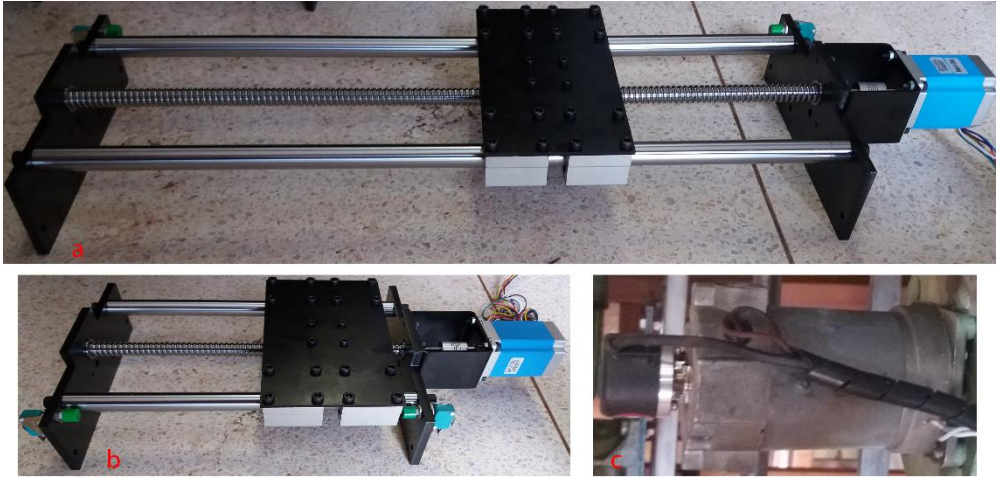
Motor and gearbox: (a) Stepper motor and gearbox to linear movement; (b) Stepper motor and gearbox to CTWD movement; (c) DC motor, encoder and gearbox to orbital movement.
